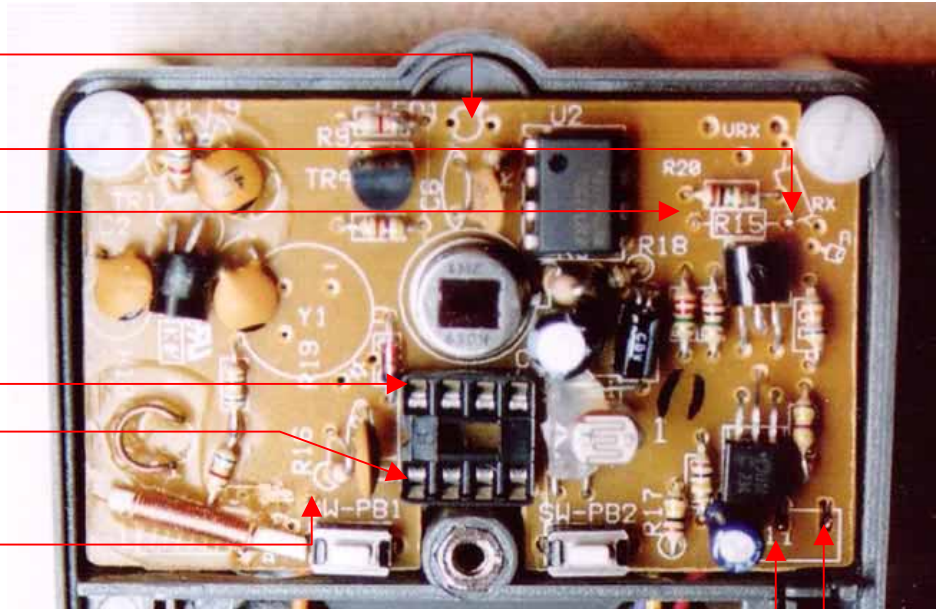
X10 DIP Opto Board_ Wiring Solder Positions
